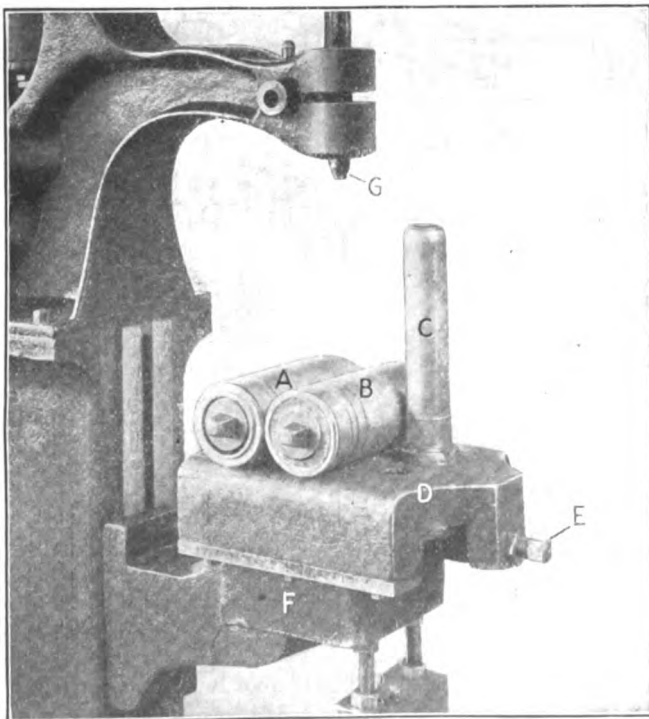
HIGH-SPEED RIVETER FOR BASE PLATES
